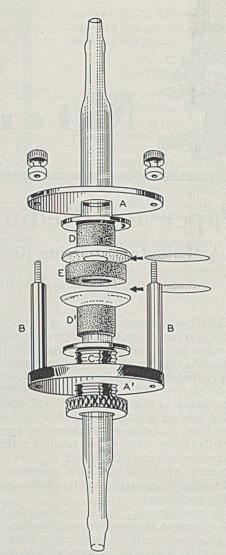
DETAILS OF FLANGE AND CLAMPING ASSEMBLY FOR HOLDING IMPREGNATED PAPER DISKS IN FLUID STREAM
